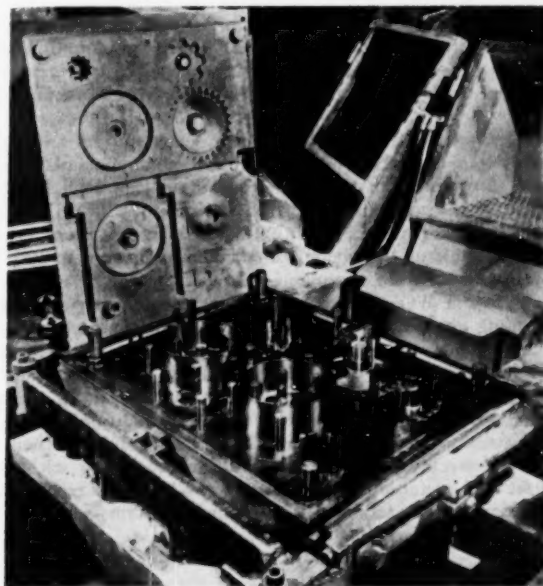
CLOSE-UP OF A PATTERN AT THE MOLD DELIVERY POSITION OF THE SHELL-MOLDING MACHINE SHOWS TYPICAL CLEAN, SHARP, ACCURATE MOLDS PRODUCED
